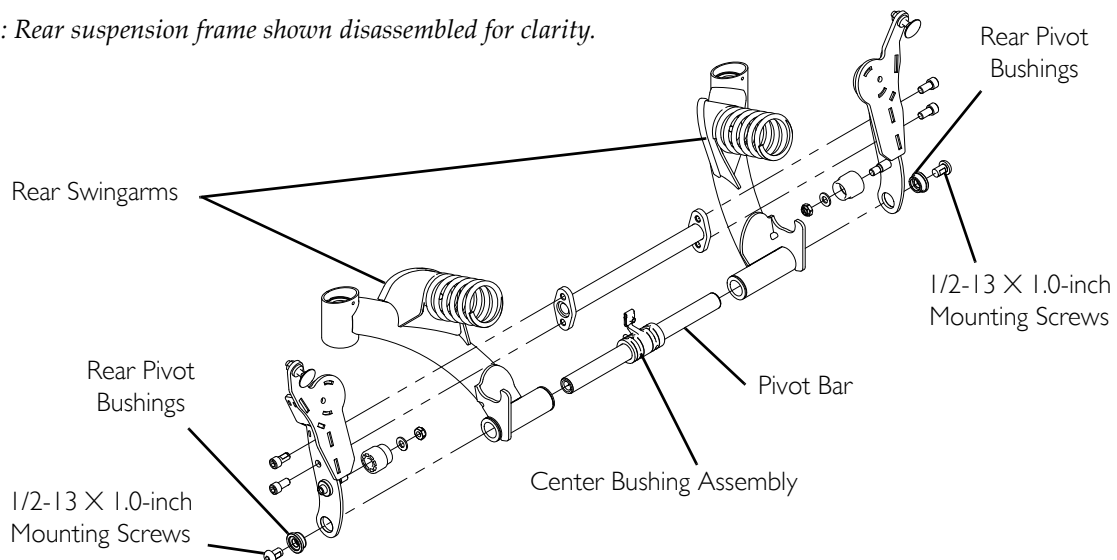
Removing/Installing the Rear Suspension Assembly
